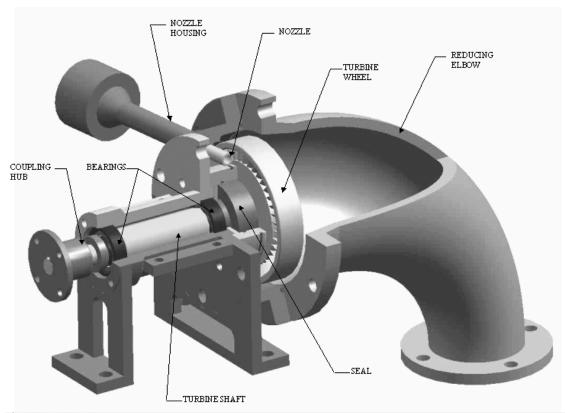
Cut-away Drawing of Two-Phase Axial flow Turbine for Heat Pump
